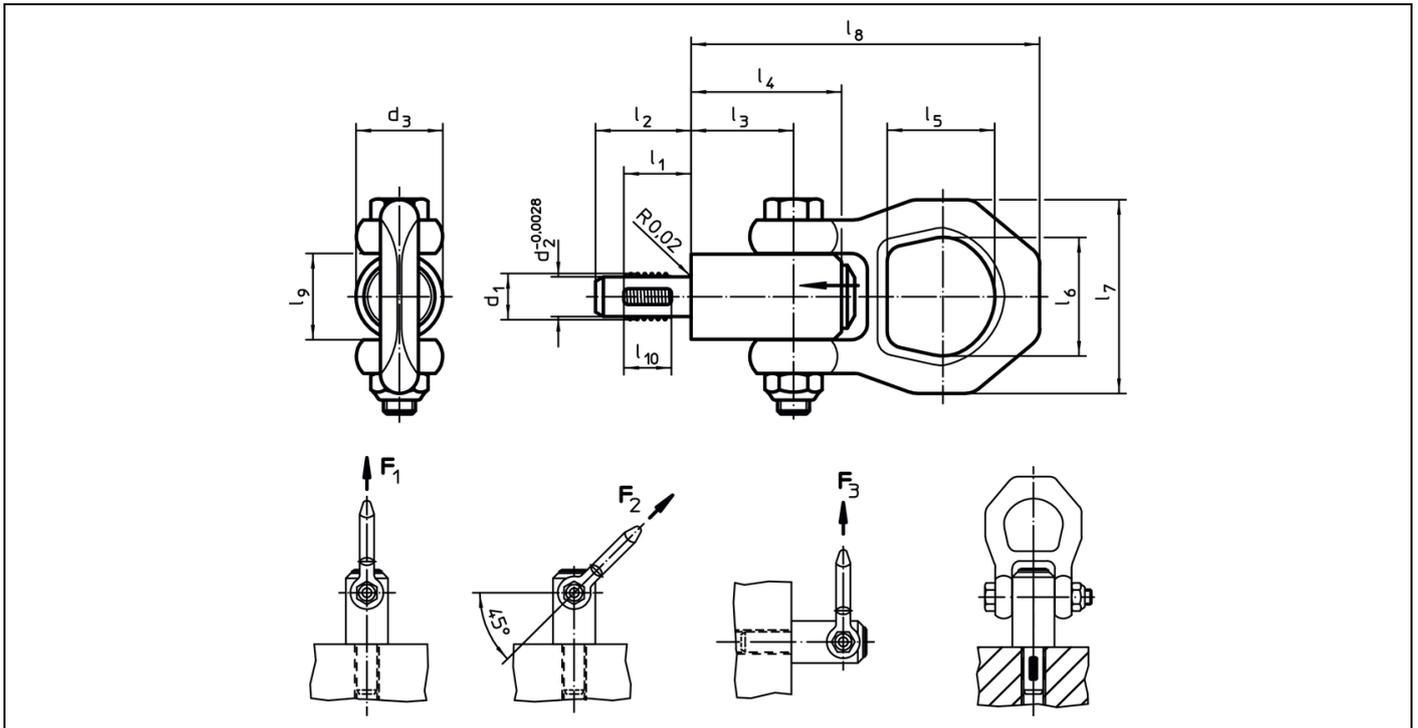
Dimensioned drawing - threaded lifting pins, self-locking - EH 2B352
